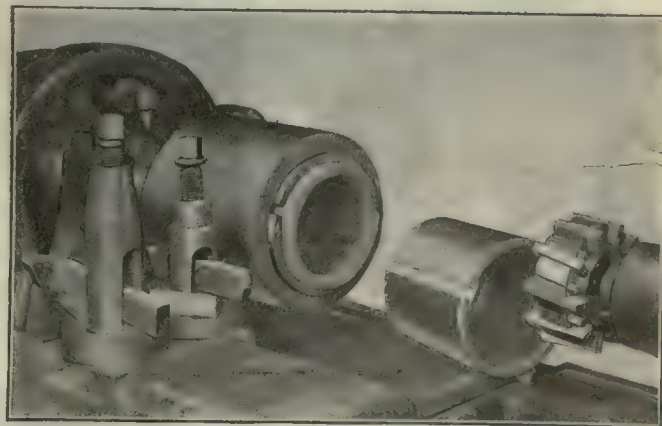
HOLDING PISTON FOR BORING SKIRT
